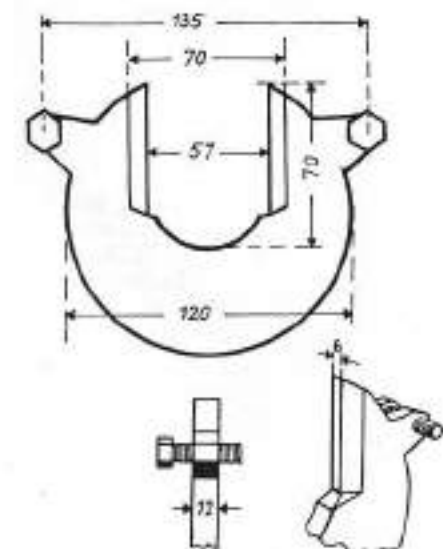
A holding clamp can be fabricated locally to prevent axle movement during assembly. Dimensions are in millimeters.
